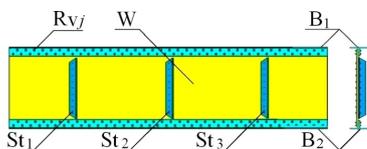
Operations T_3 and T_4 of installation, drilling, and riveting of stilts
